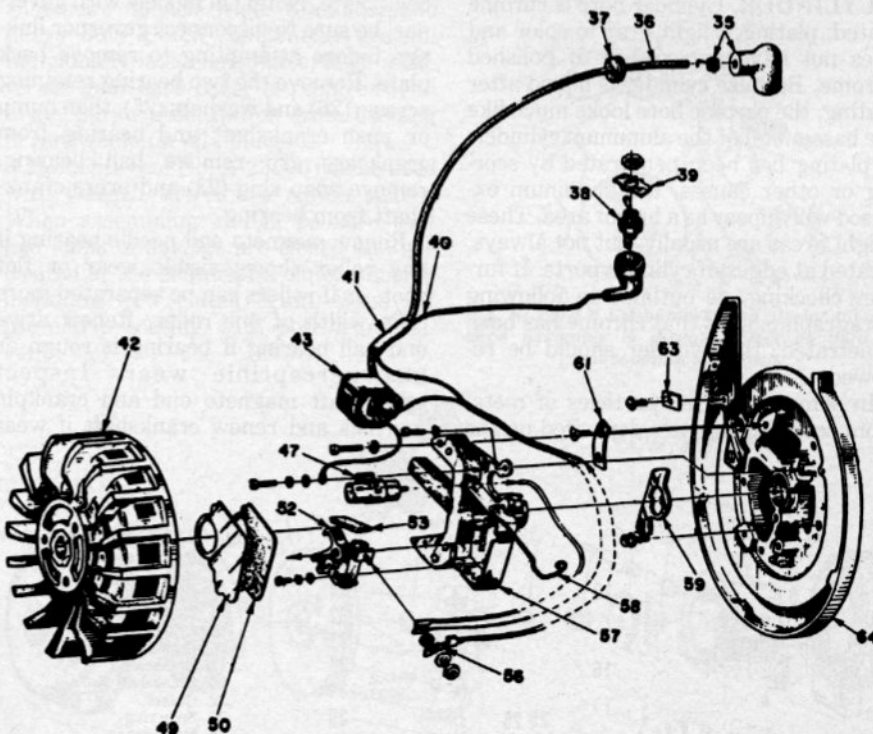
Exploded view of typical REPCO magneto used on all models. Rotor (flywheel) has three tapped holes for installation of remover (Homelite tool No. AA-22560). Magneto back plate (64) supports crankshaft seal and needle bearing.
